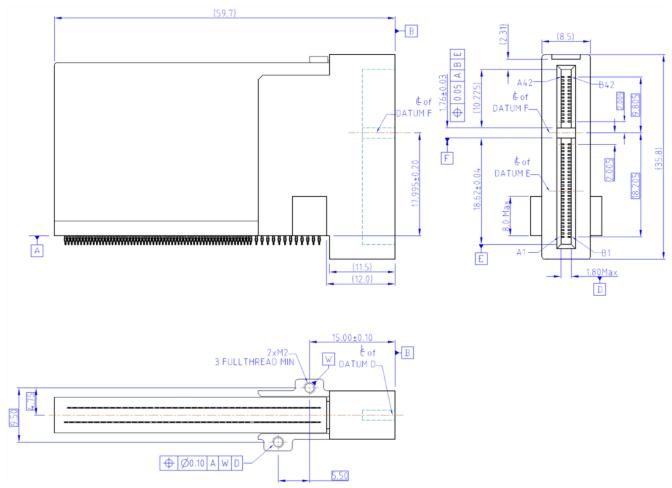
2C RIGHT ANGLE ORTHOGONAL CONNECTOR DIMENSIONS (MM)
